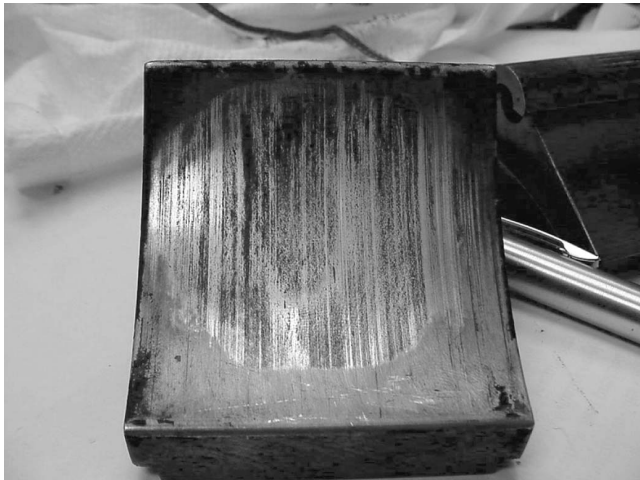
One of Lower NDE Bearings with Varnish Buildup (Babbitt is Not Wiped).
